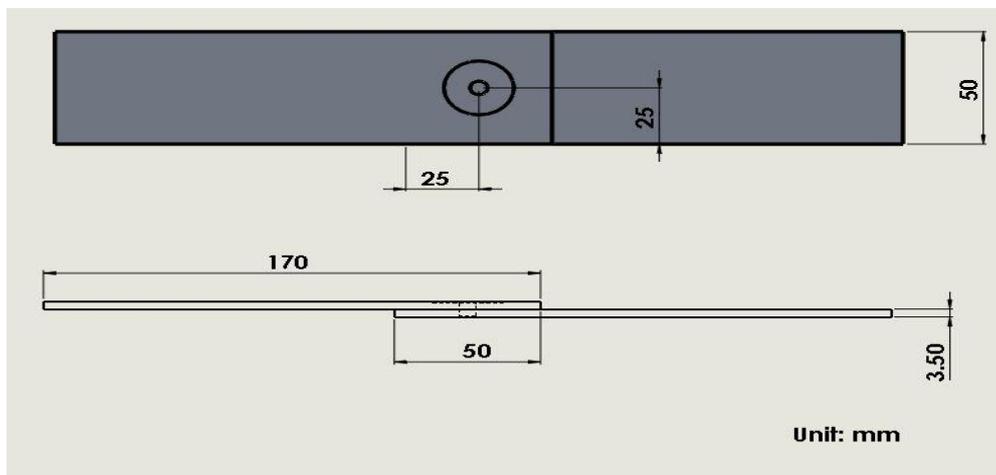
The tensile-shear specimen. (Dimensions in mm)
